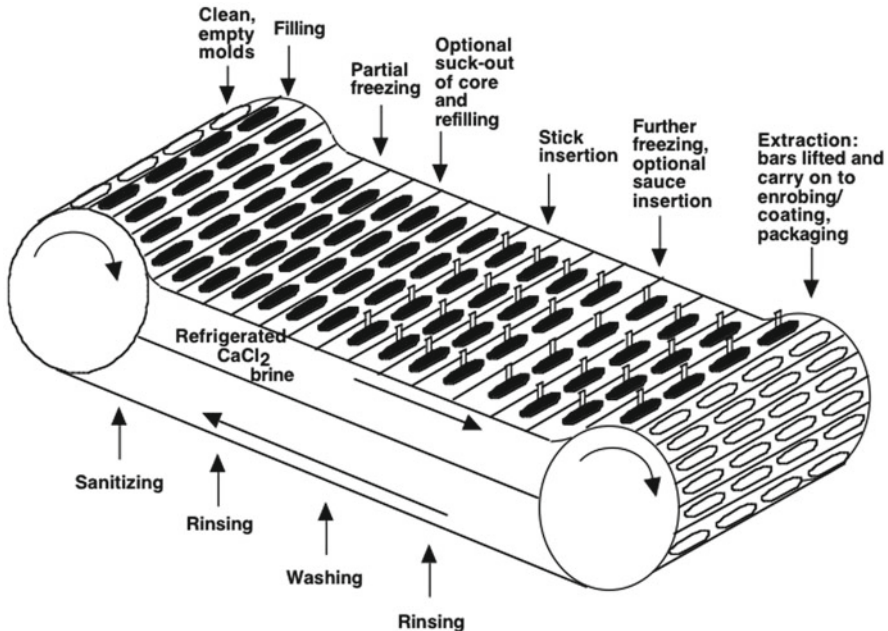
An illustration of a straight-through machine for making molded novelties
